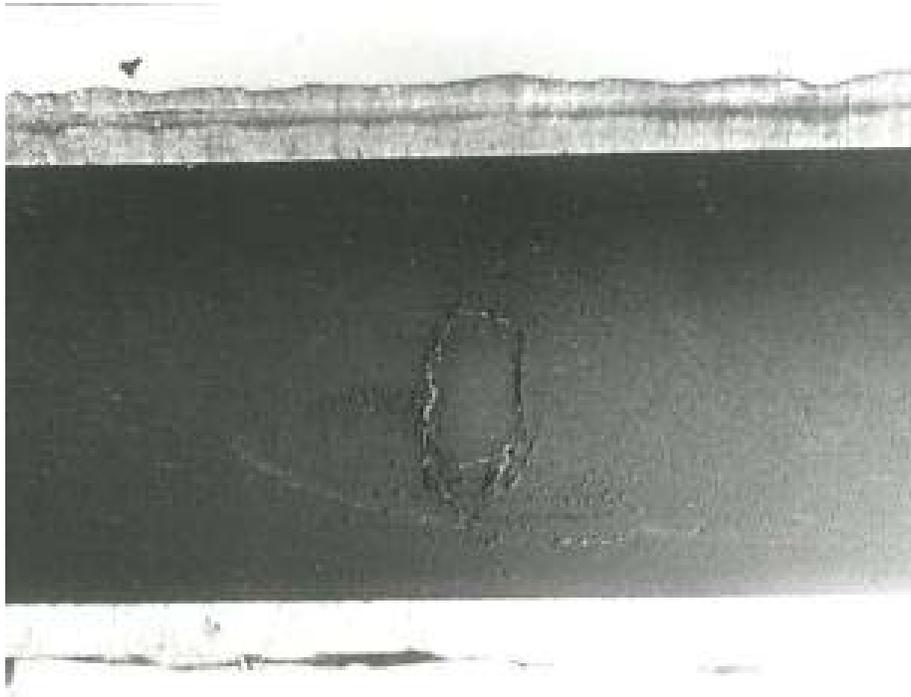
Photograph of a carbon steel boiler tube cut in half lengthwise. Corrosion fatigue cracks initiate at the I.D. of a tube, opposite a buckstay attachment on the O.D. (Mag. 1x)
